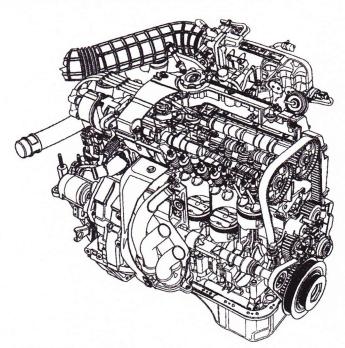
Major components of a four-stroke engine. Courtesy of American Honda Motor Company, Inc.
